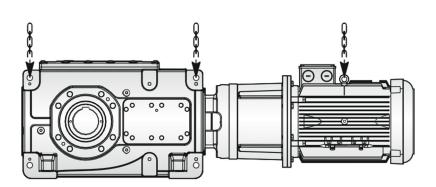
c: Positions of additional lifting points for geared motor reducers of type HB
